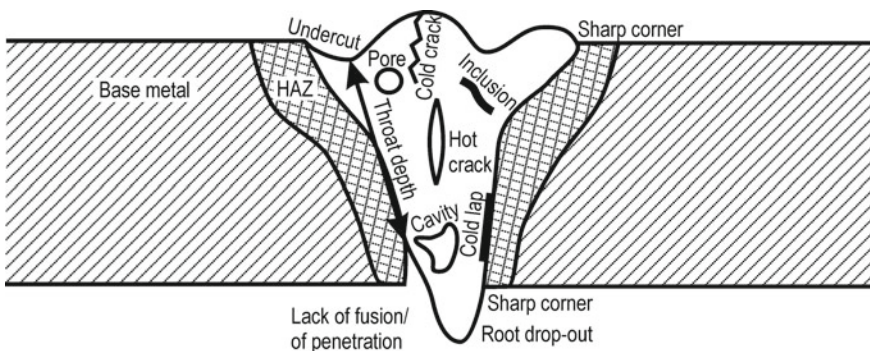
Cross section of a laser weld with different kinds of imperfections that could appear
